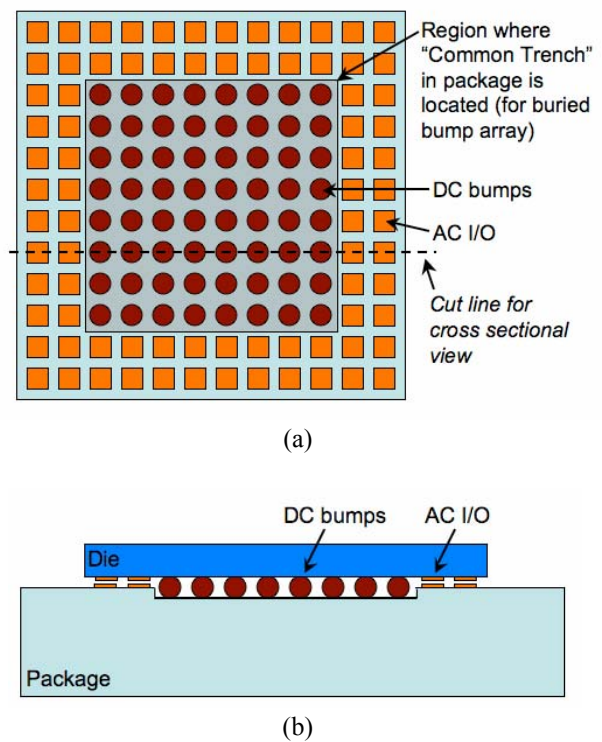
ACCI Physical Structure for laminated interposers: (a) Top view of package, (b) cross sectional view of assembled die and interposer (package)
